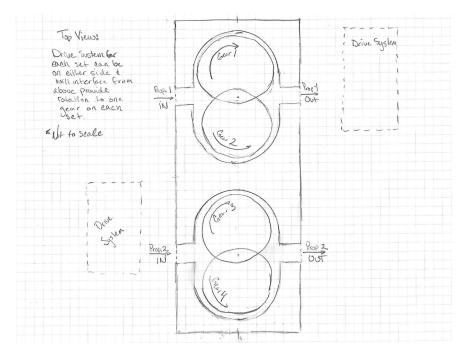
Idea 2 Top View - This shows two external gear pumps next two each other (essentially in parallel). The drive systems will be housed on either side of the column of gears. This will allow a nice, rectangular prism outer casing/shell to house the entire system. Wall thicknesses, gear size, gear tooth amount will all depend on further pump and structure design.
